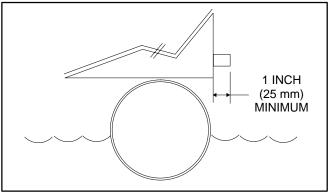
TERMINATING THE EXHAUST TAILPIPE
